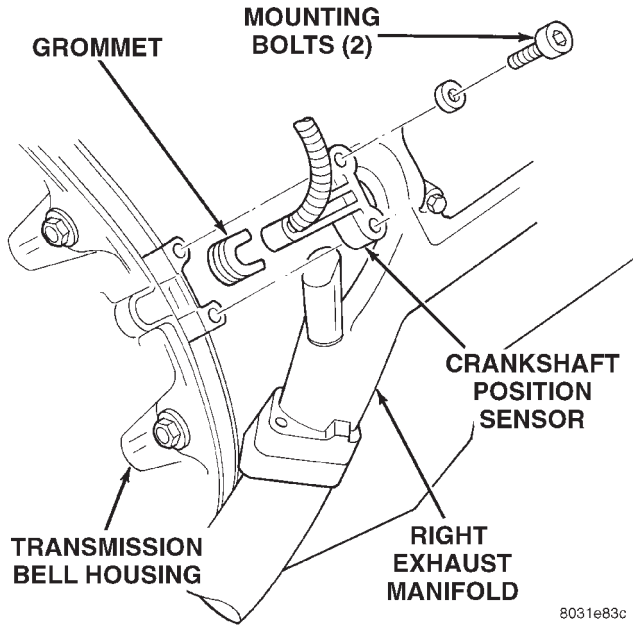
Crankshaft Position Sensor—5.2L Engine
